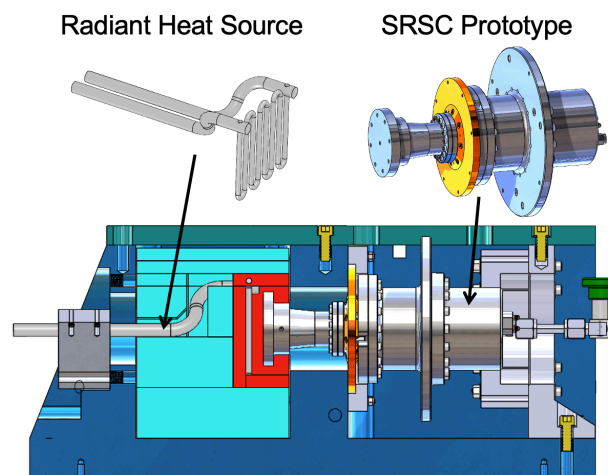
SRSC prototype installed in fixture used to carry out environmental testing.
